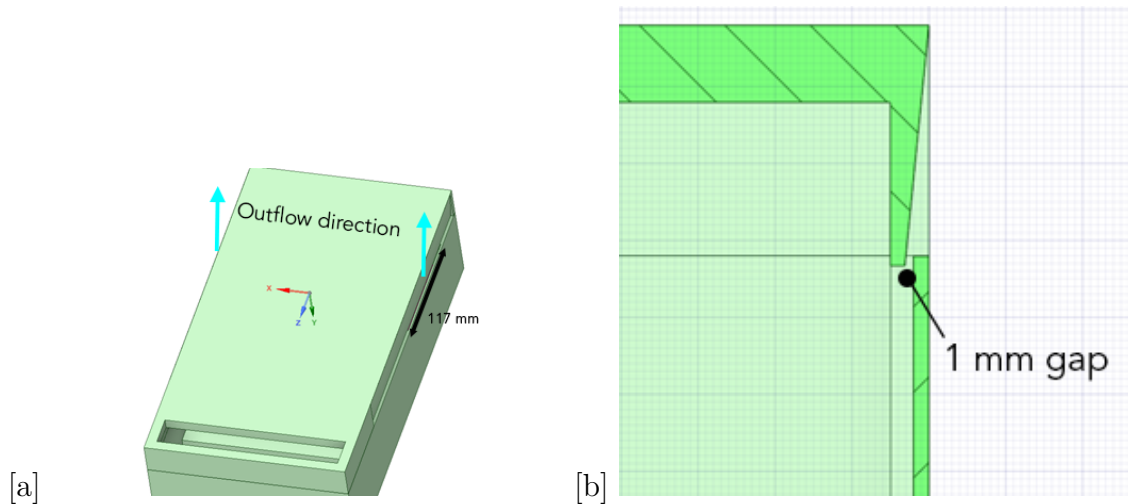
[a] Isometric view of the Unigill outlet hole depicting the outflow path. [b] Sectional view of the Front and back covers illustrating the 1 mm gap to form the outlet.
